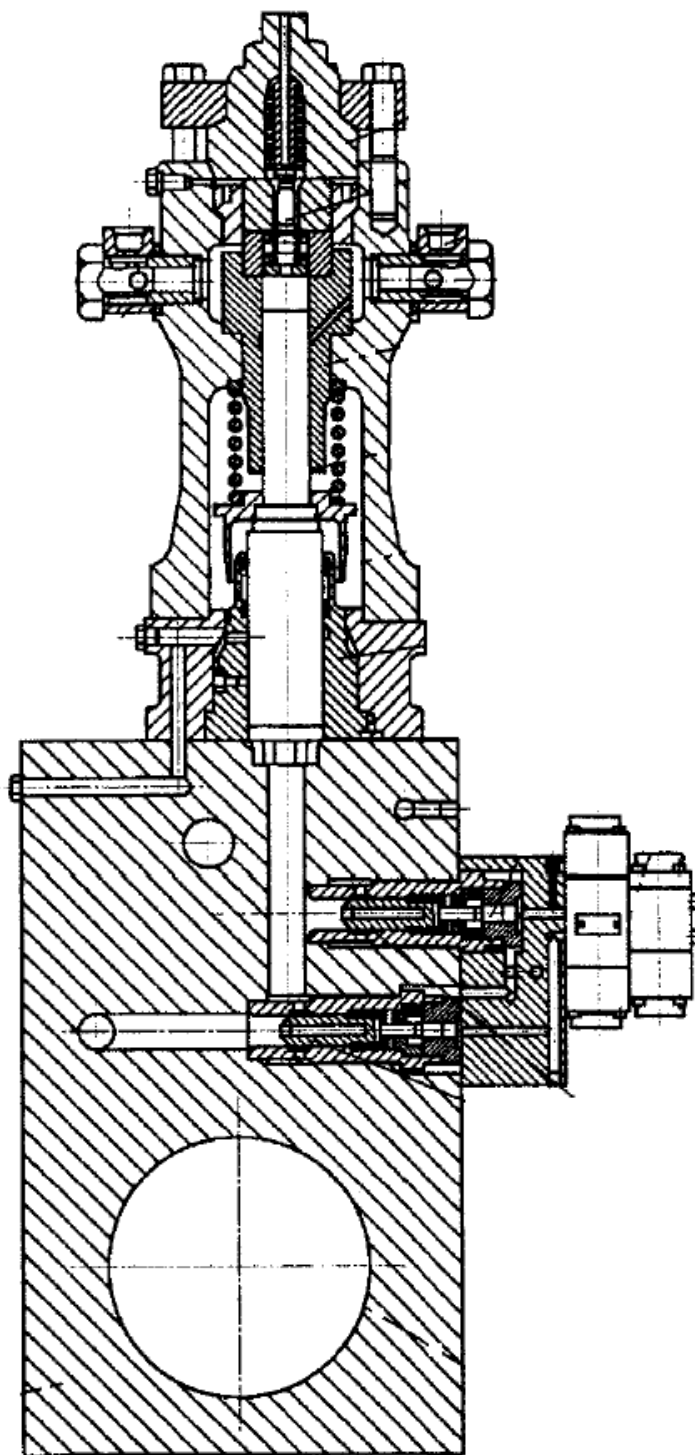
High-pressure fuel pump with a hydraulic drive system manufactured by Mitsubishi, installed on the UEC Eco-Engine
